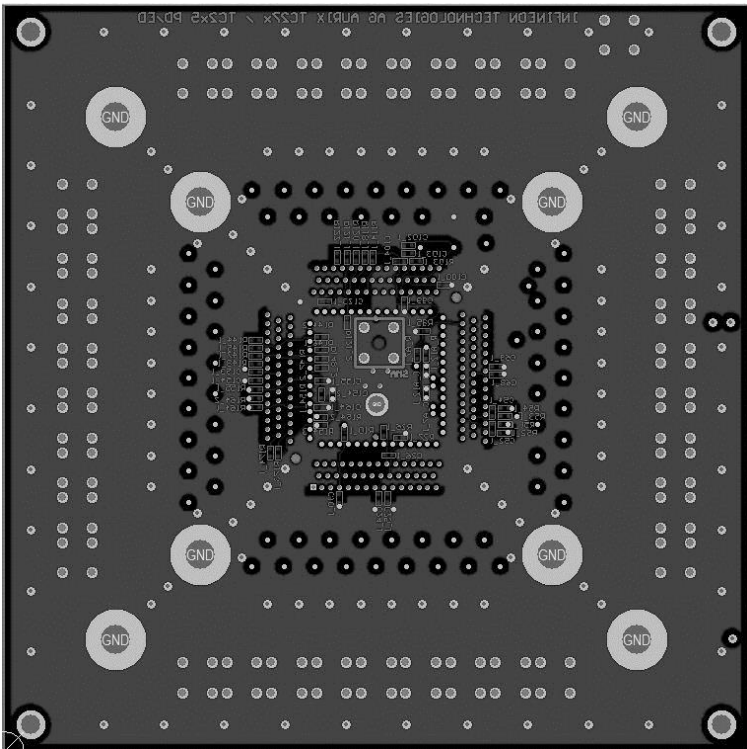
Bottom layer example of system level ESD test board with microcontroller
